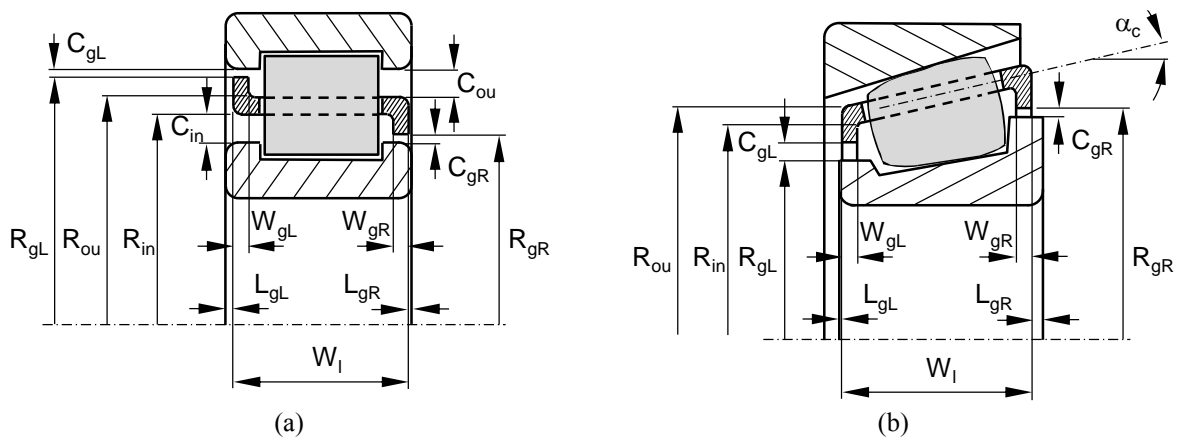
Cage for roller bearings: (a) Cylindrical, with null semi-cone angle; (b) Tapered. Note that a cage will not have both outer and inner guide lands.
